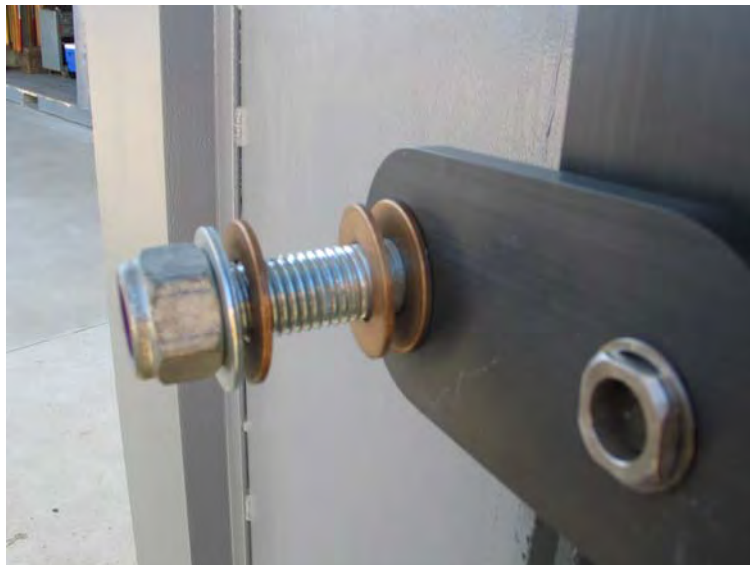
Disassembly of Bolt, Thrust Bearings, and Washers
